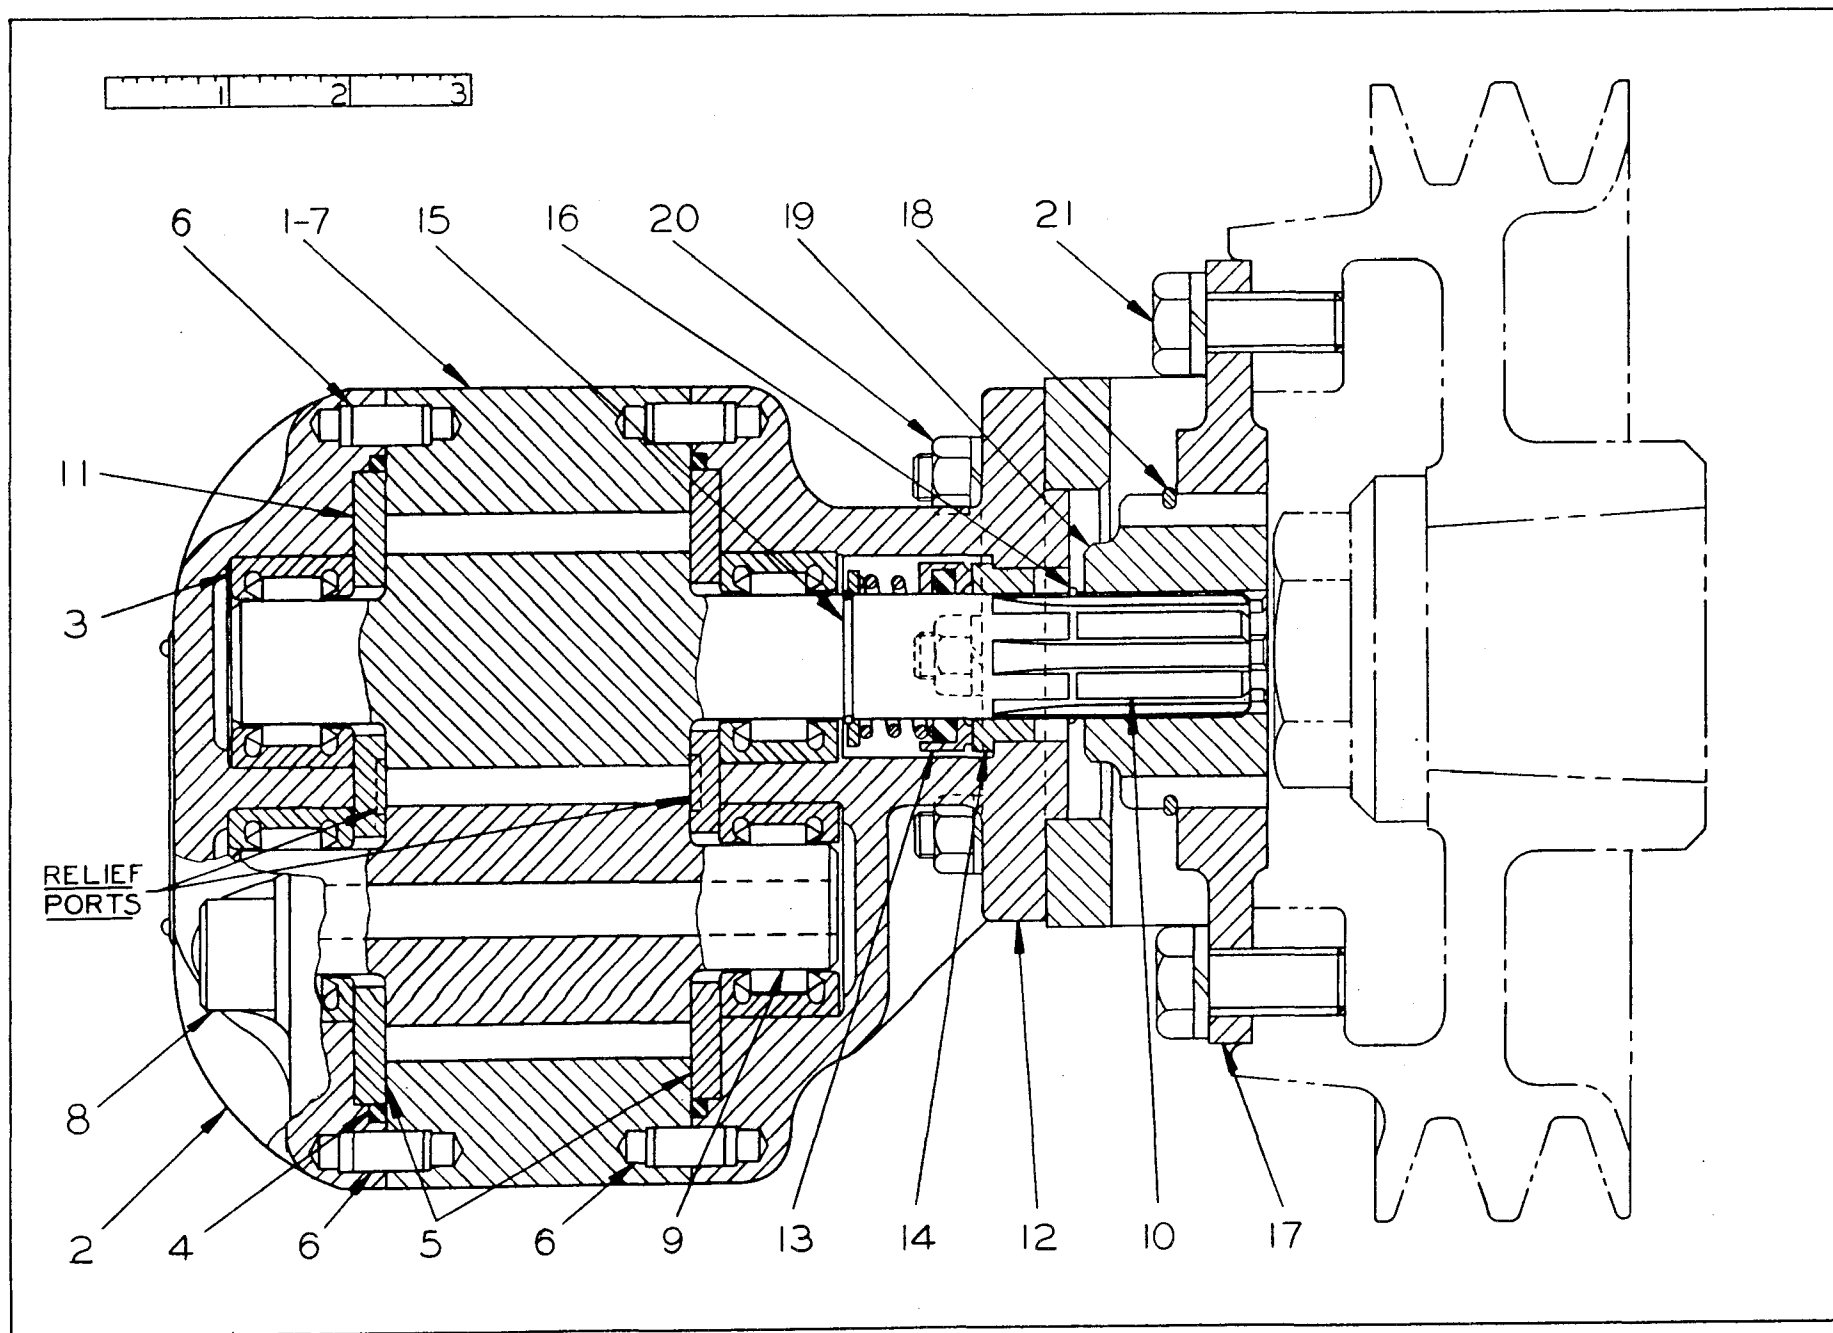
PUMP MOUNTING AND DRIVE GROUP
